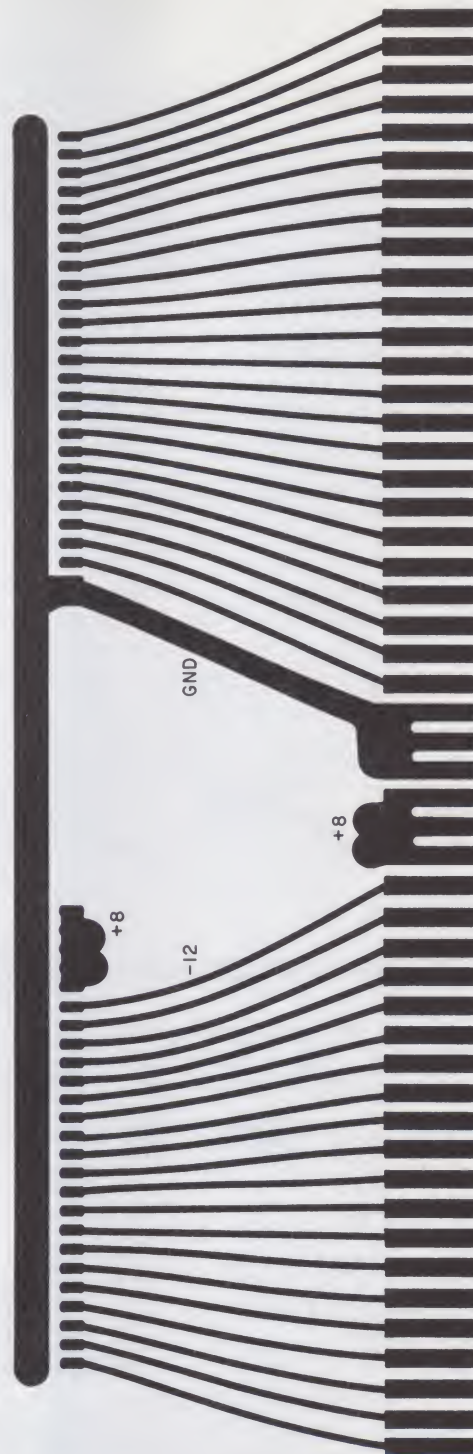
This is a full-sized etch guide that can be used for etching the extender card. The center points for drilling are not included on this layout.
